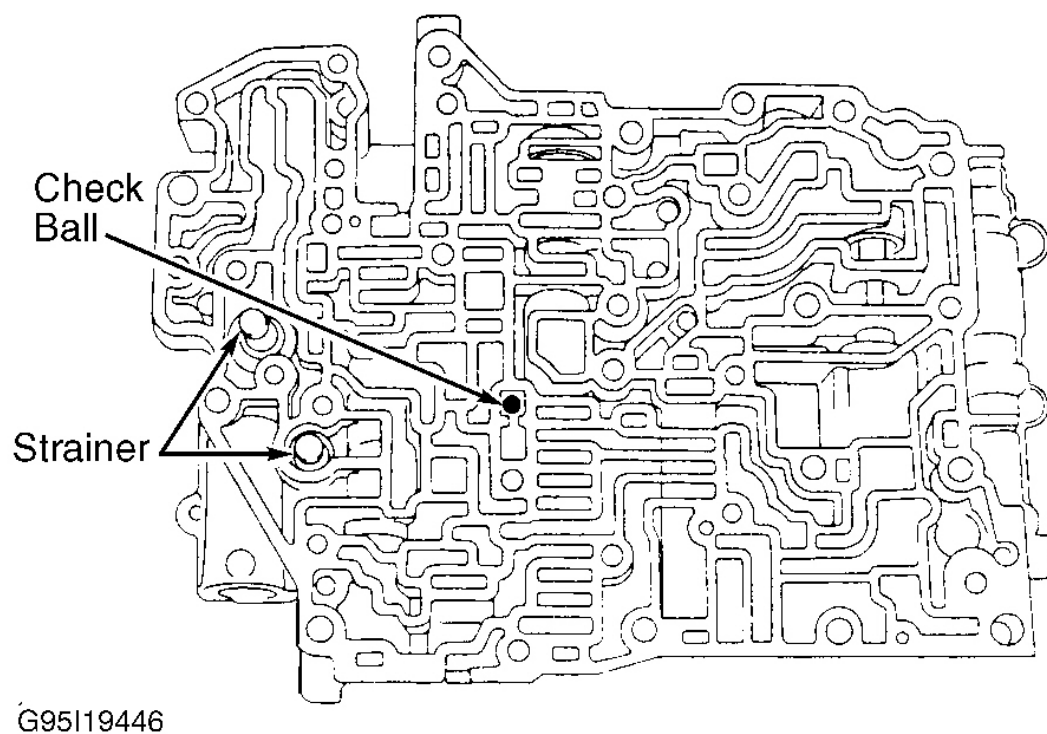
Locating A-541E Lower Valve Body (Top) Check Balls
